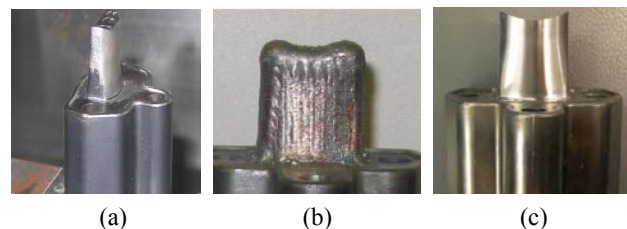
Die core repaired via surface patching (a) Before repairing (b) After deposition (c) After surface machining
